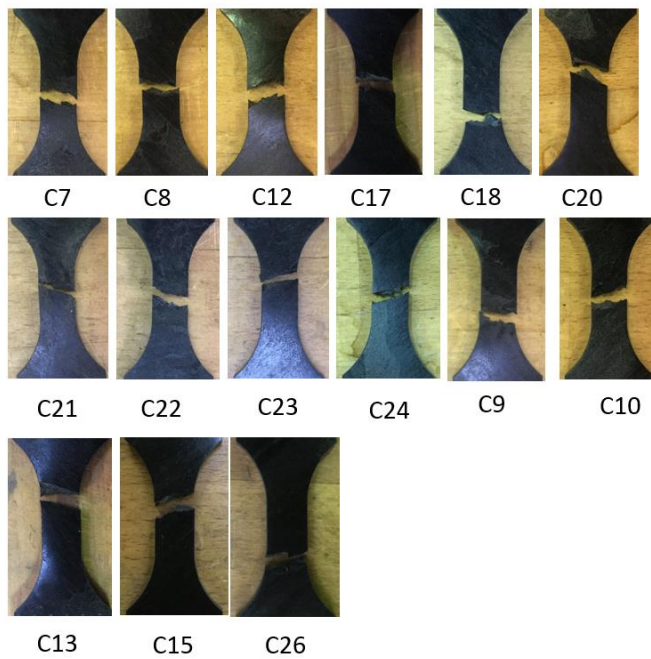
Fracture specimens for 45° coupons at R=-1.
